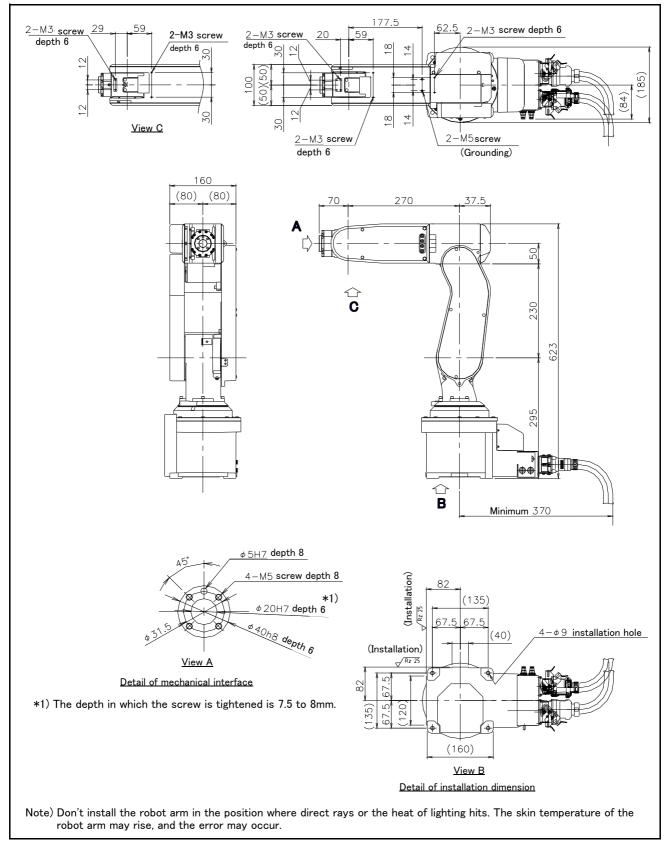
Outside dimensions (CE marking/KC mark specification)
